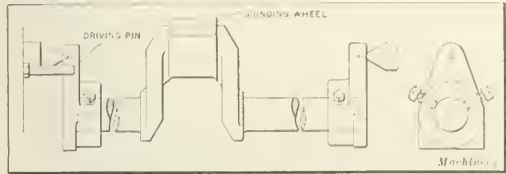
Method of holding and driving a One-throw Crankshaft when grinding Crankpin
